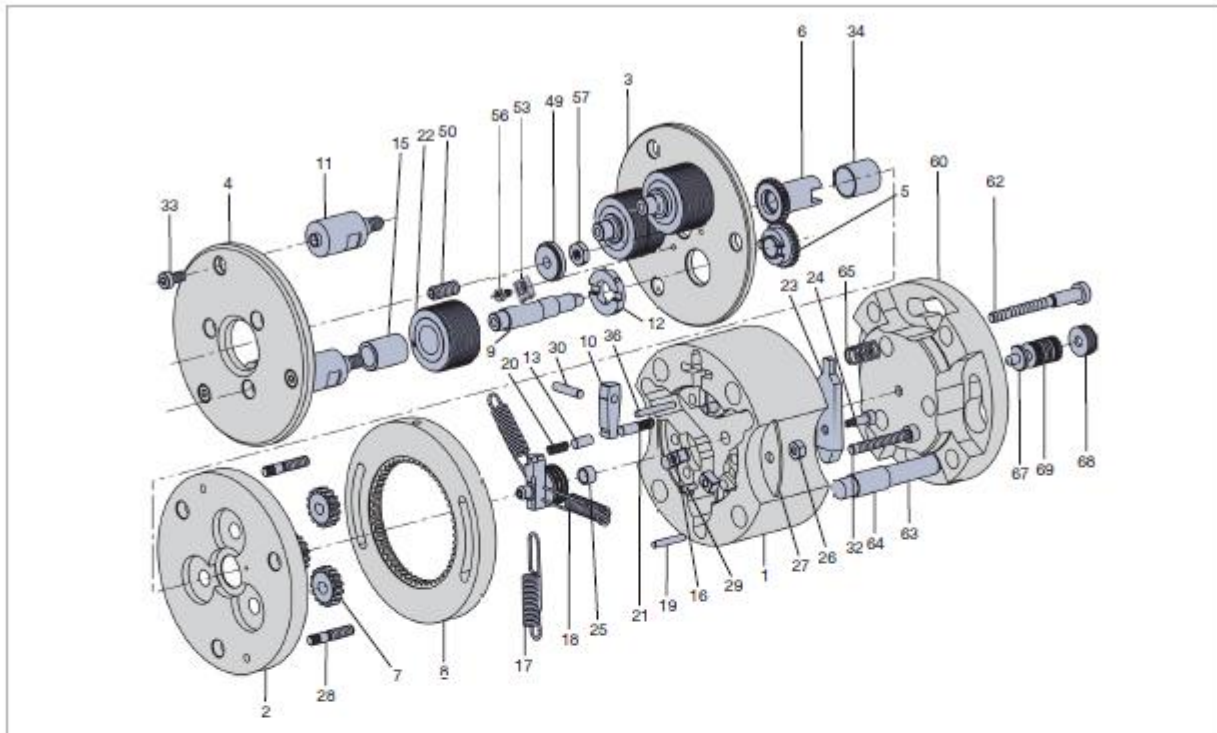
Exploded view, spare parts EW10A00 and EW10A01
